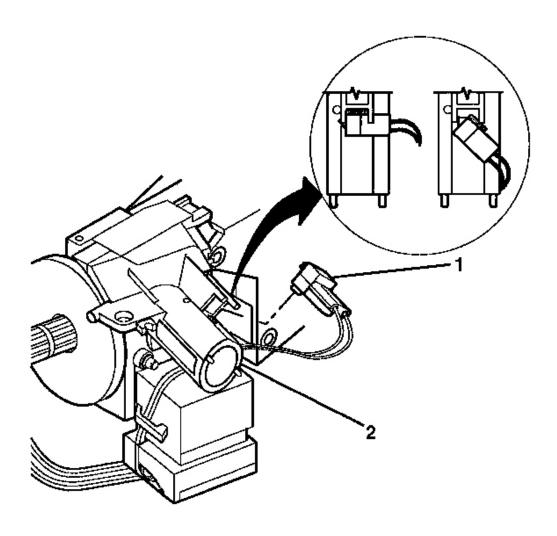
Identifying Key Alarm Connector At Ignition Lock Cylinder Case Courtesy of GENERAL MOTORS CORP.
